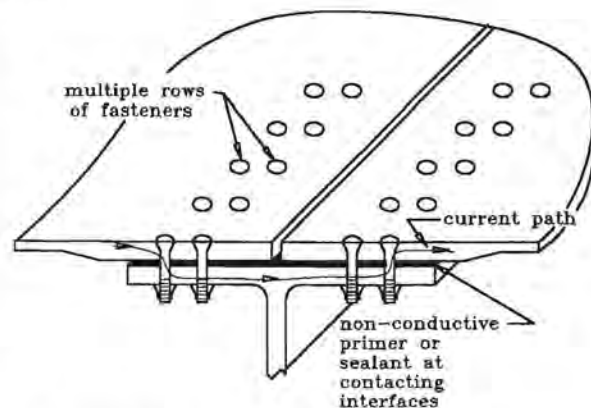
Bonding through mechanical fasteners. Mating surfaces coated with non-conductive finishes and sealers.
